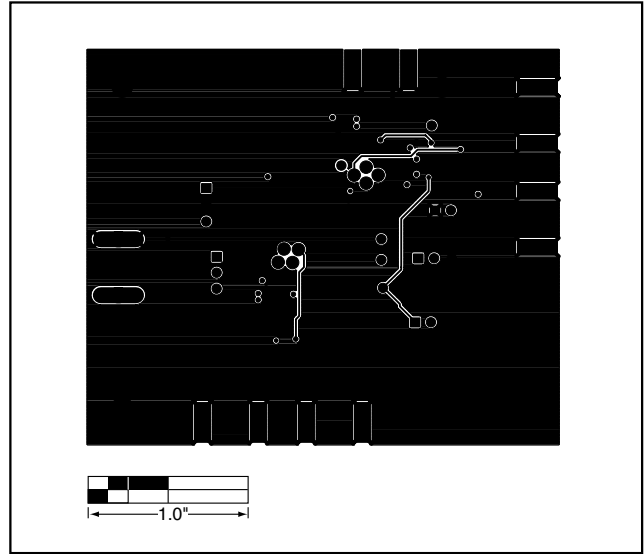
MAX3289 EV Kit PC Board Layout—Solder Side
